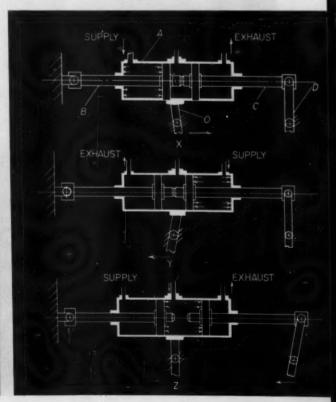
(Below) Triple-acting cylinder (A) permits remote control of this gear transmission. Either pneumatic or hydraulic operation is possible.
